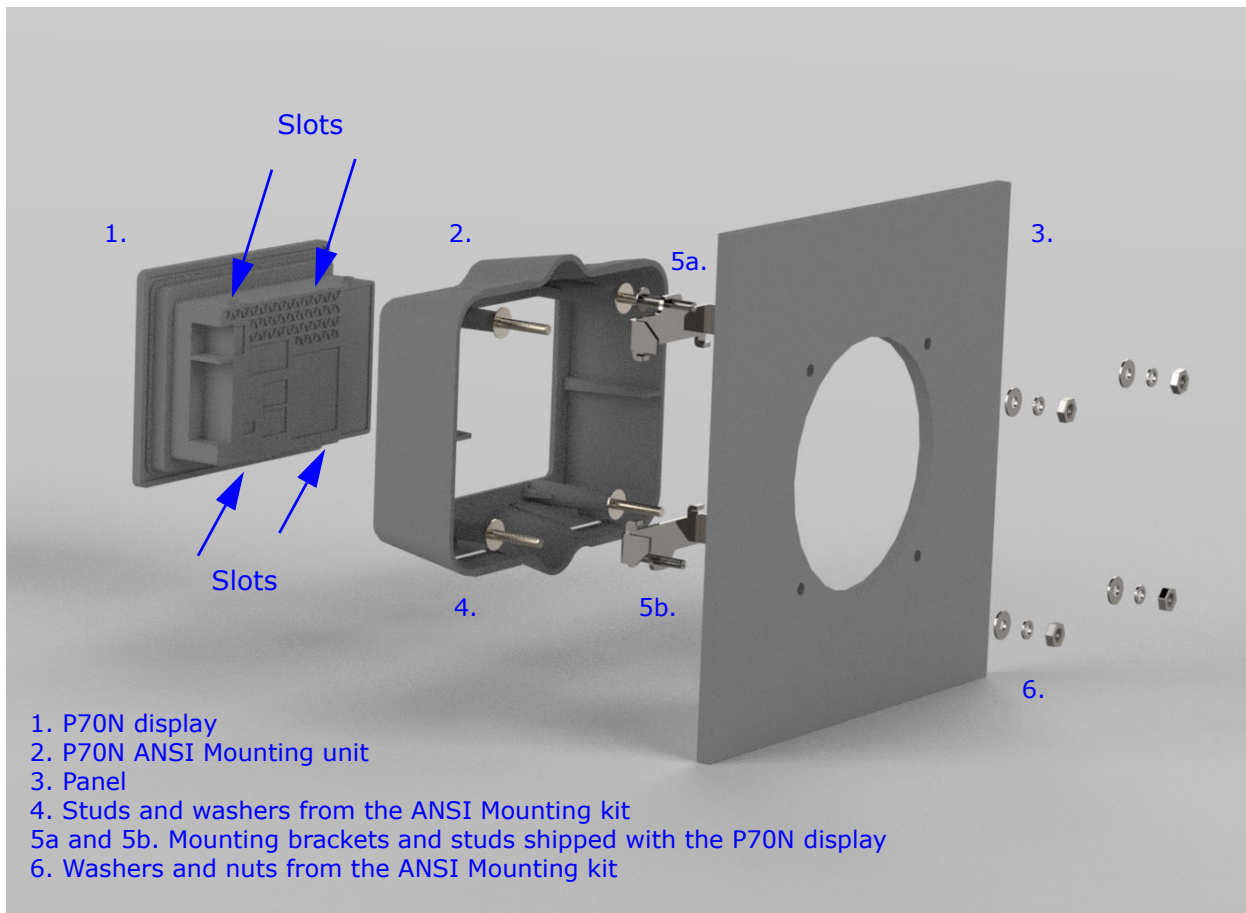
P70N Mounting 2 Using the Optional P70N ANSI Mounting Kit
